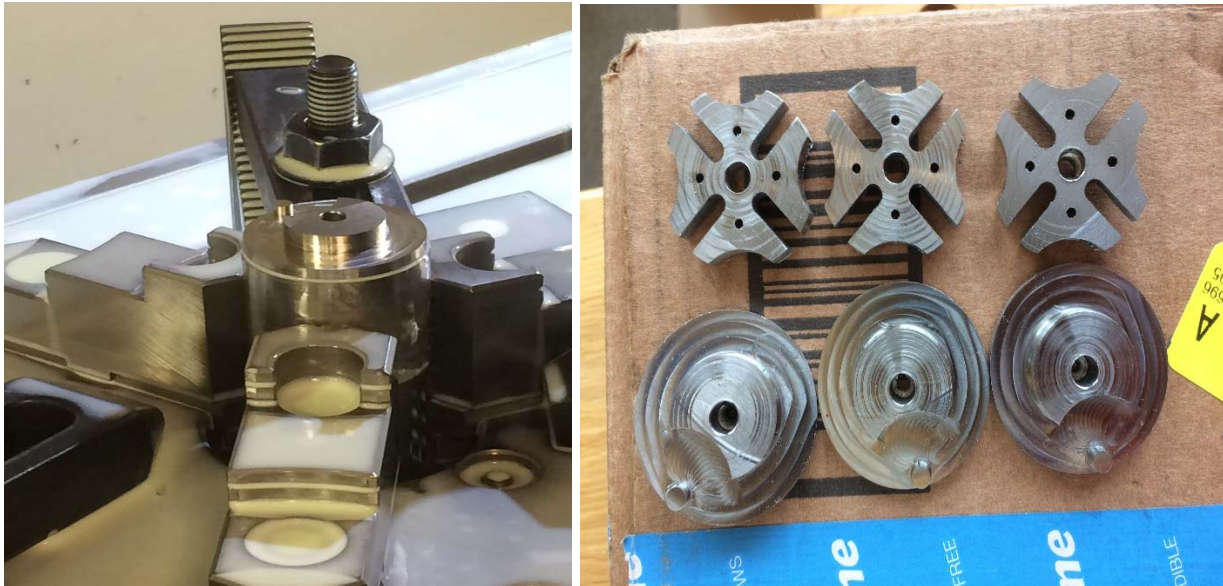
The intricate Geneva mechanisms and cam follower parts were created from the CNC machining process.
